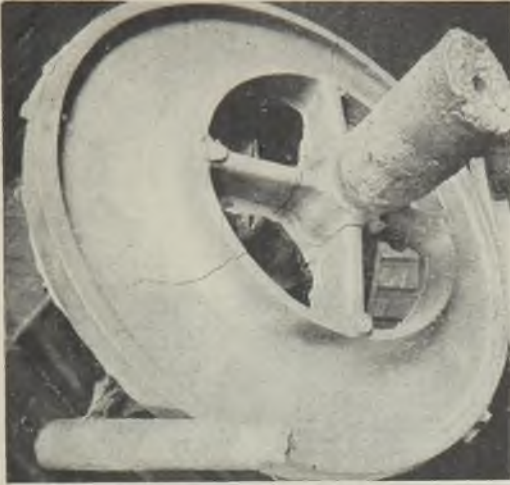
WRONG METHOD OF MOULDING A MONEL CENTRIFUGE CASTING.
